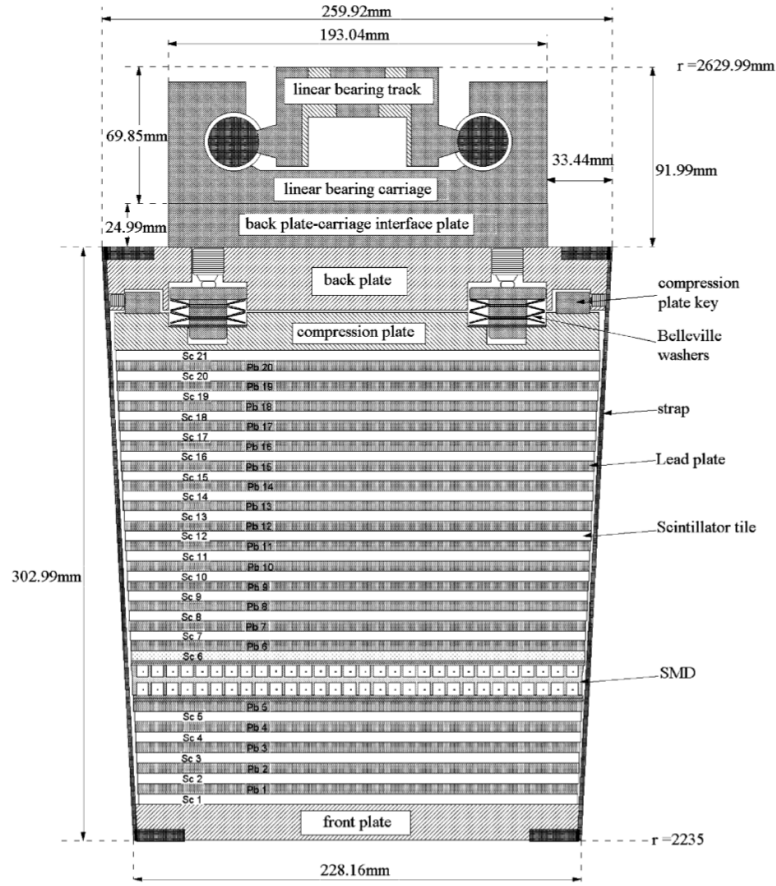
Side view of a STAR BEMC module showing the mechanical assembly including the compression components and the rail mounting system. Shown is the location of the two layers of shower maximum detector at a depth of approximately $5X_0$ from the front face at $\eta = 0$.
